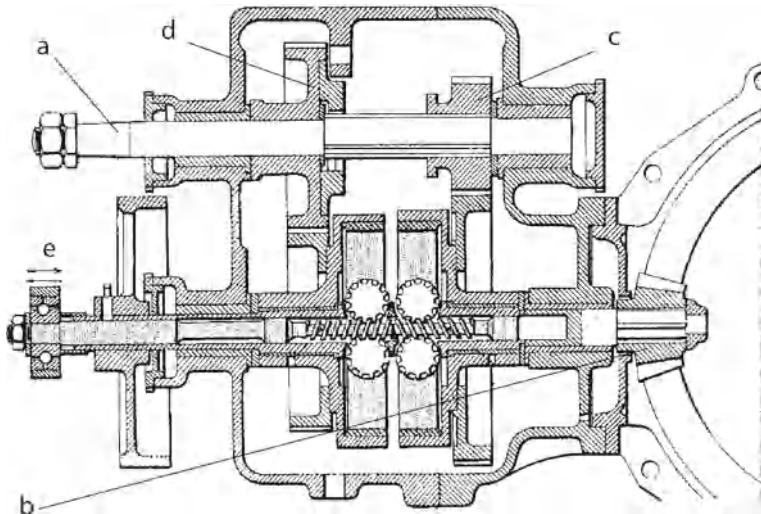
The De Dion & Bouton gearbox can be considered as a precursor to power-shift gearboxes. By shifting a shaft with the bearing e , it is possible to engage one of the two shoe clutches available on each gear; a start-up clutch is not required (redrawn from Genta and Morello 2009)
